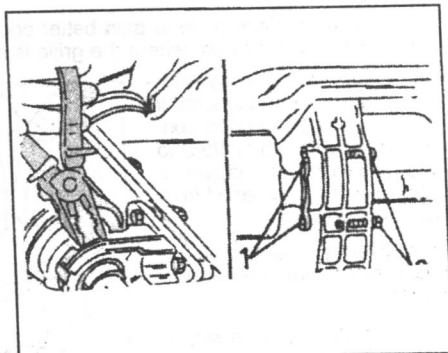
Removal of the R.H. drive shaft. First remove the circlip on the L.H. side and push the shaft in the direction of the arrow. Then slacken the bolts (1) and the nuts (2) as described in the text.
